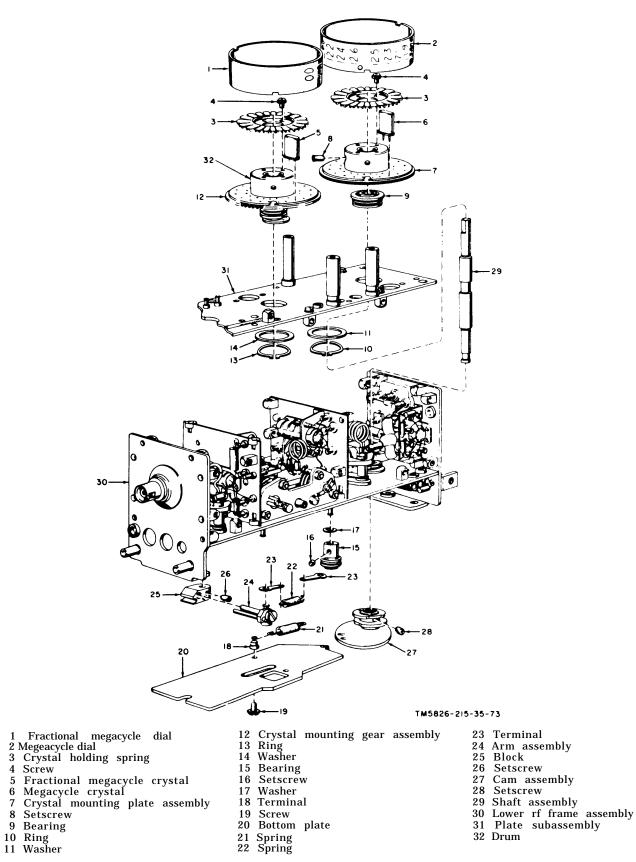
Disassembly of crystal drums and megacycle tuning mechanism.
